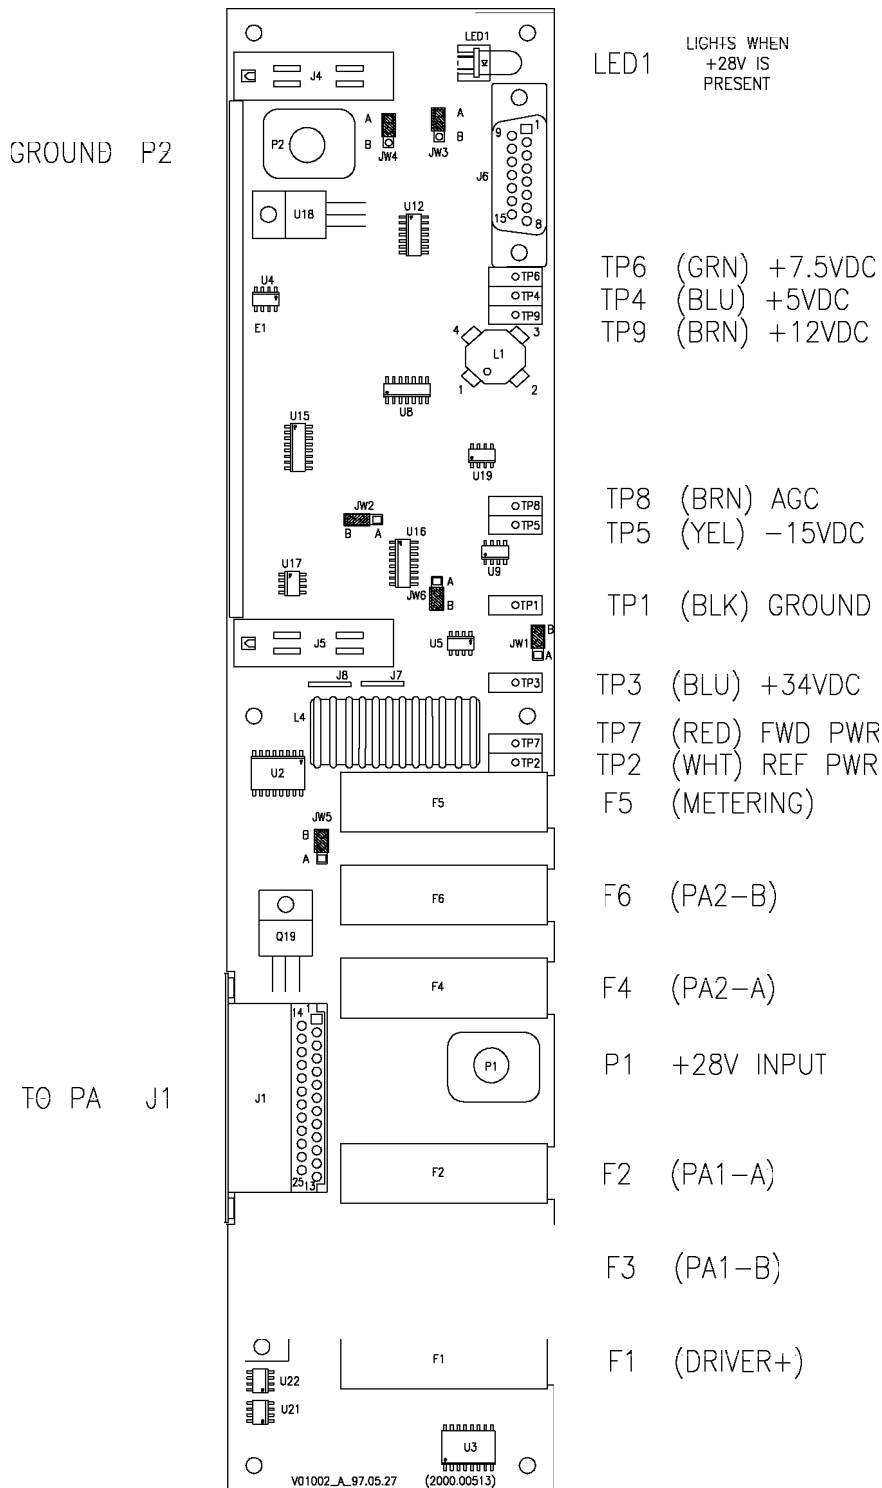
Metering Board Assembly 2000.00513/2000. 00116
